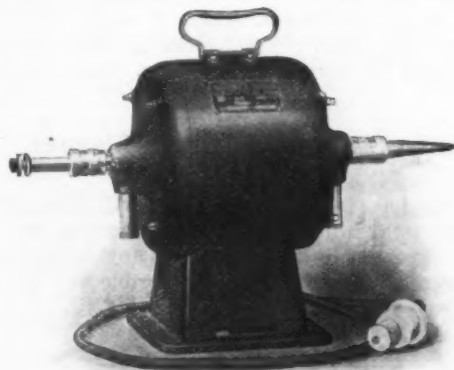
Westinghouse Buffing, Polishing and Grinding Motor
